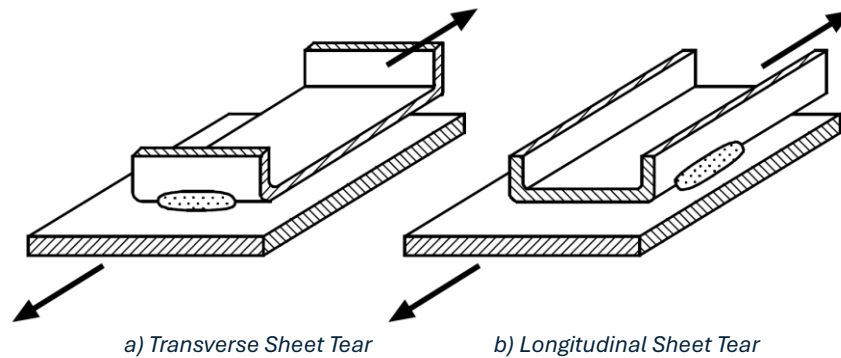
Flare Groove Weld Failure Modes [9].
